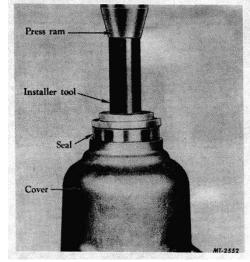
Installing Inter-Axle Differential Cover Oil Seal.
